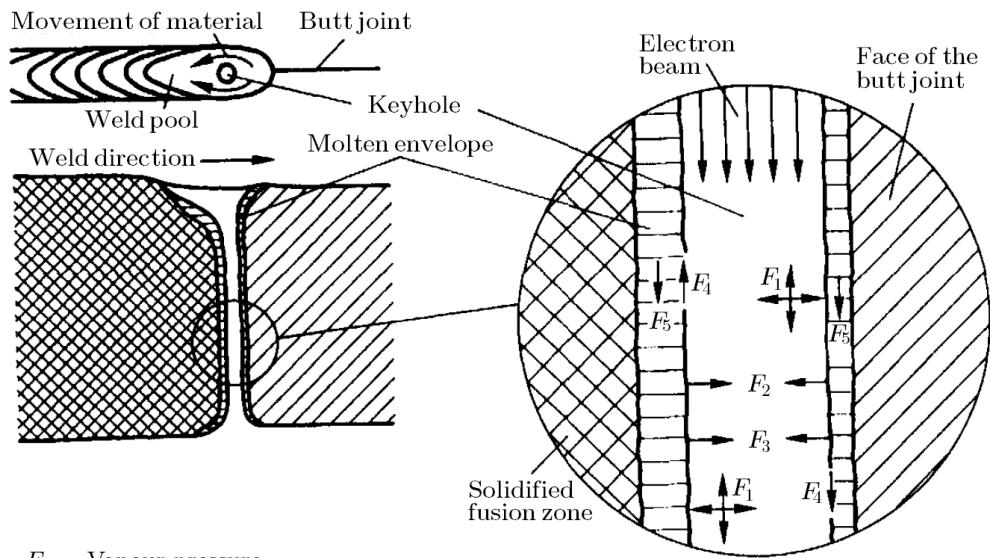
Scheme of a keyhole welding process with indicated coordinate system; adapted from [42]
